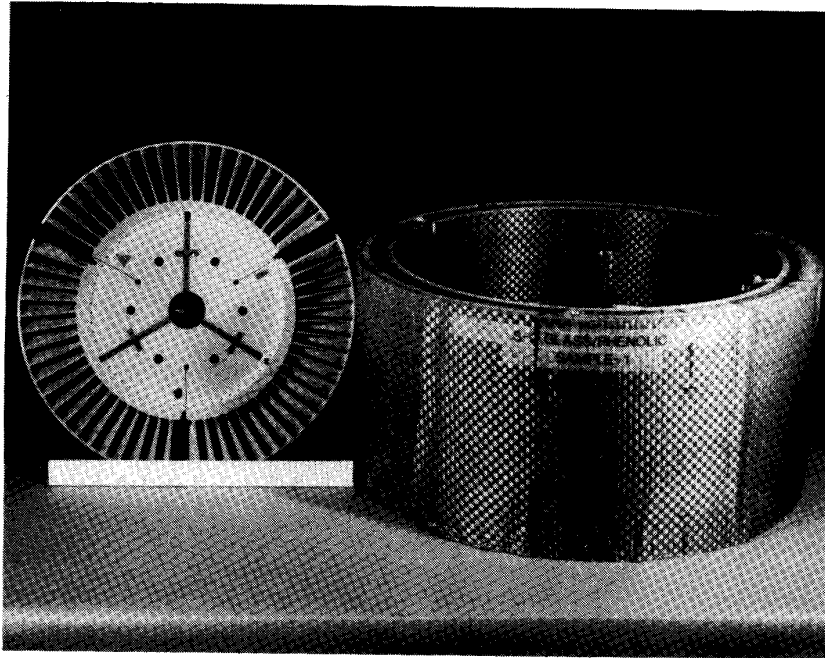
A TYPICAL CONTAINMENT RING AND A MODIFIED T53 TURBINE
